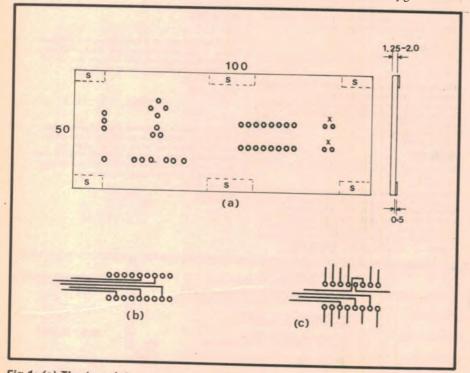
(a) The template, showing the 5/16" and 2.05mm holes, and the spacers glued to the underside; (b) Five tracks drawn with a 0.5mm pen; (c) The use of reduced diameter IC pads to allow between-pad conductor tracks.
